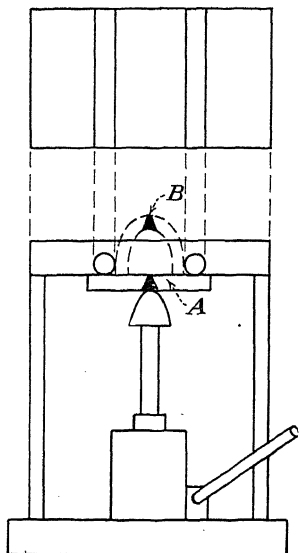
Weld-testing machine. A. Weld coupon. B. Dotted lines indicate coupon after bending.
